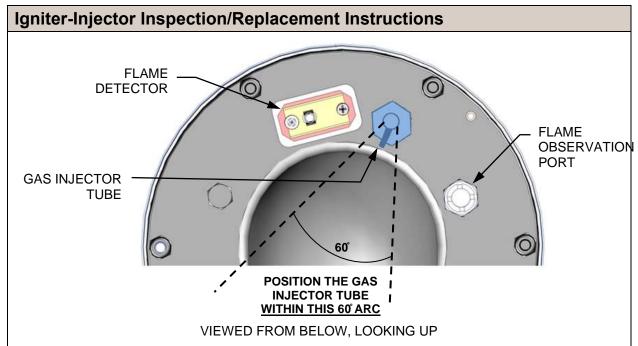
Igniter-Injector & Flame Detector Mounting Details
